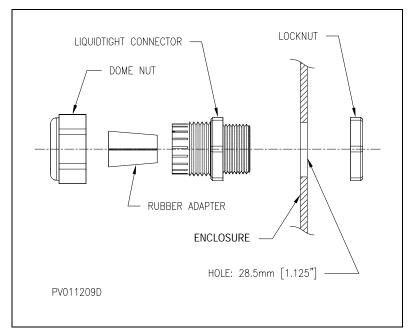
Mounting the liquidtight connectors for flexible protective conduit
